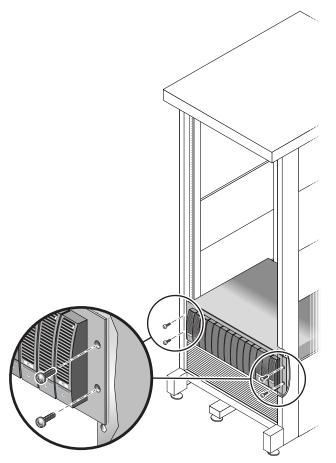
Securing the Enclosure to the Front of a Sun Rack 900/1000 Cabinet
